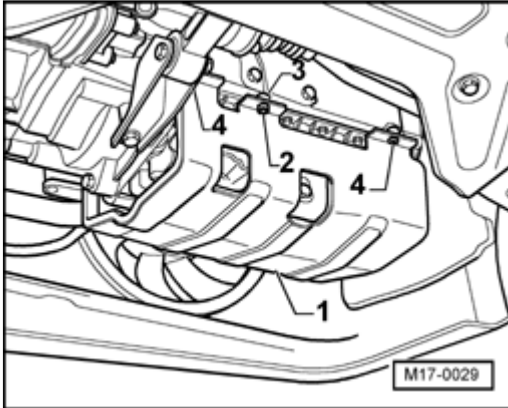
Identifying Oil Pan Cover, Bolts, Sleeves & Spreader Rivet
